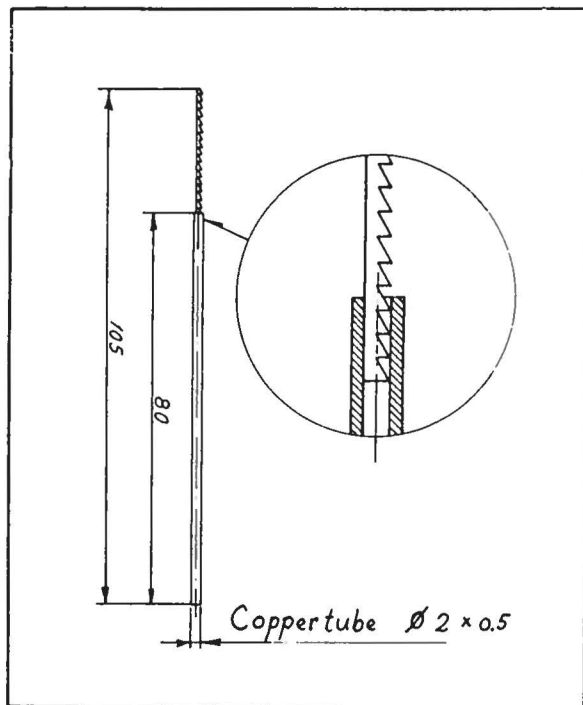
Sketch of miniature saw for preparation. A fragment of a jig-saw blade is fastened in a coppertube. Dimensions in mm.
